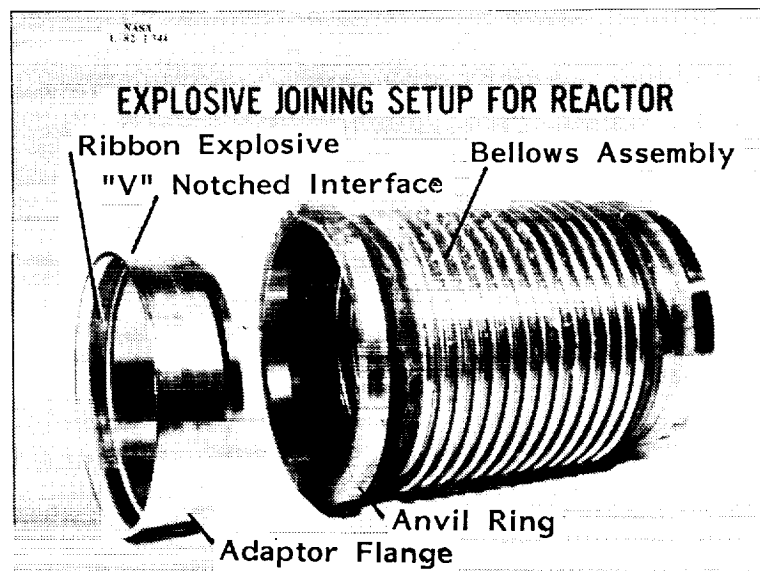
Setup for explosive joining adaptor flange to bellows assembly for Candu reactor.
